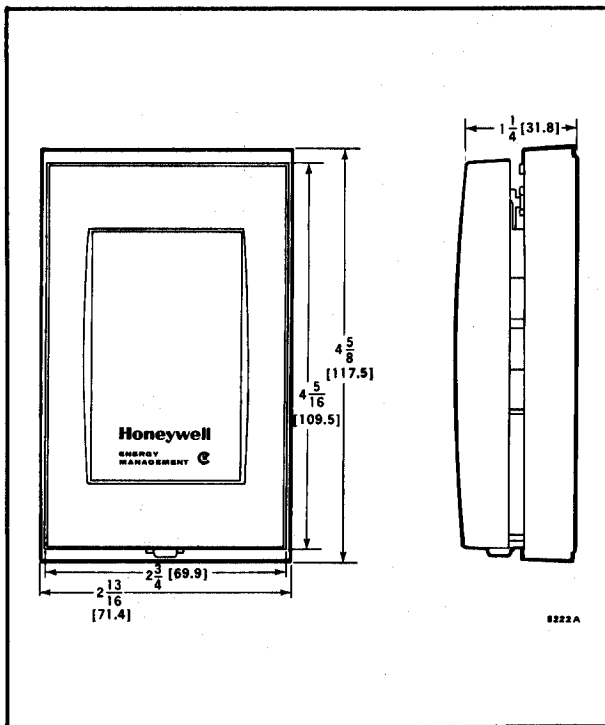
APPROXIMATE DIMENSIONS, IN in. [mm], OF T7080 THERMOSTAT.
